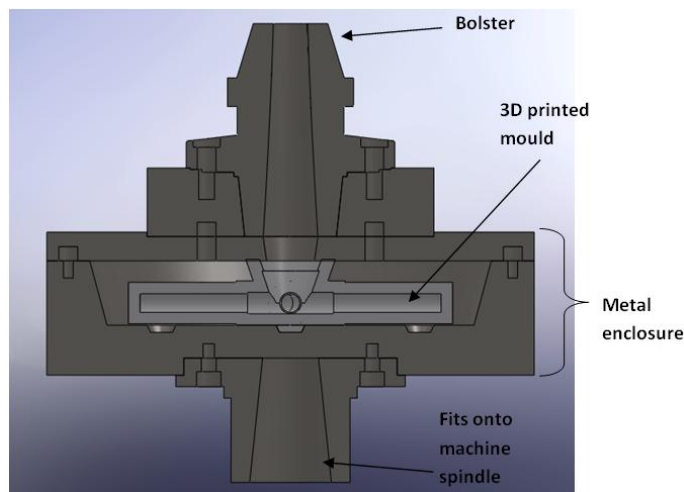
CAD sectional model of the centrifugal die and mould setup
